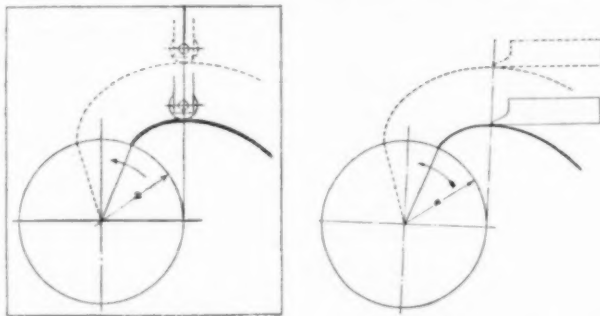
THE INVOLUTE AS A CAM FIG. 2 SHAVING THE INVOLUTE
